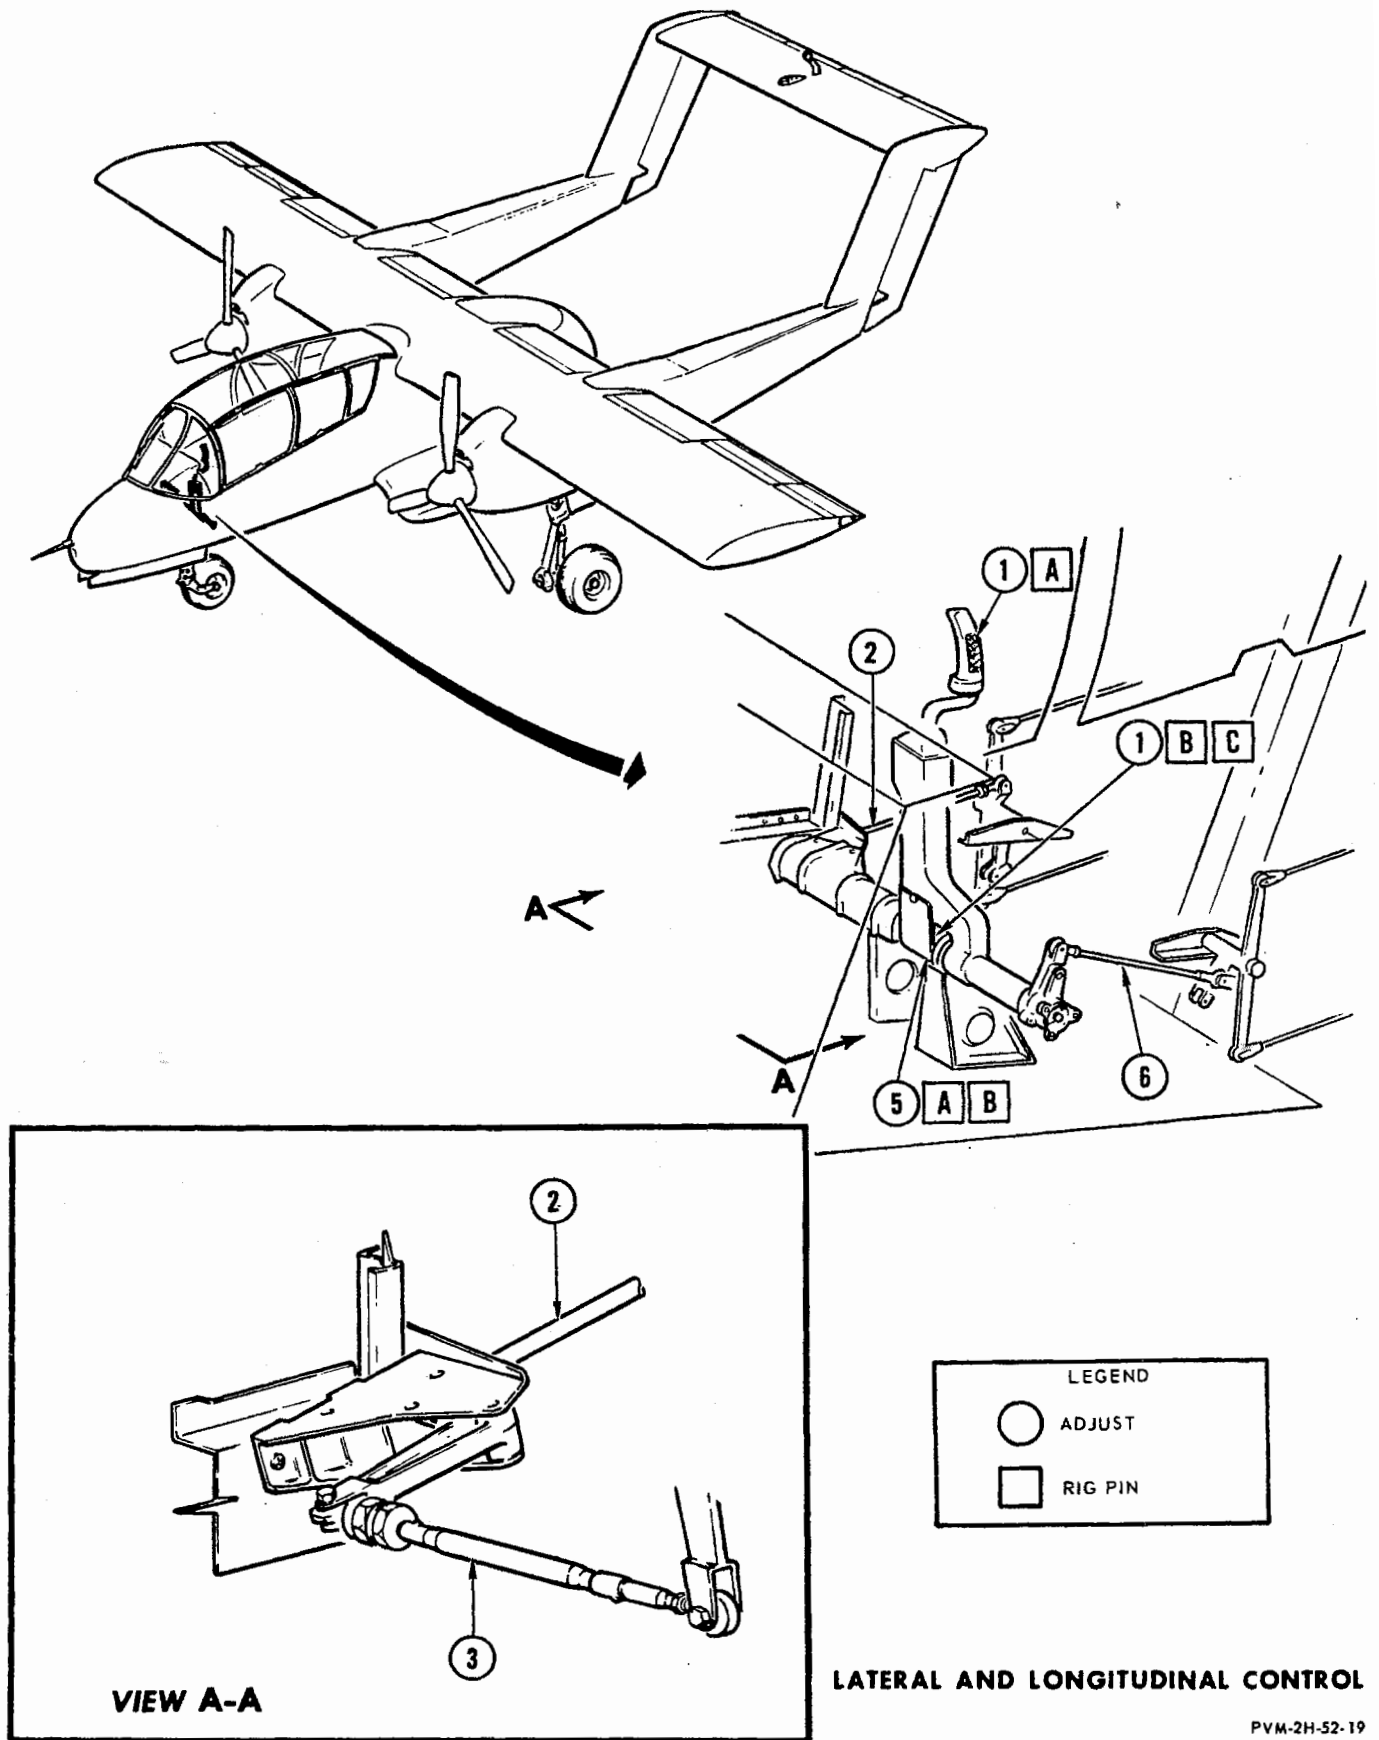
Rigging and Adjusting Observer's Control Equipment Package (Sheet 2 of 2)
